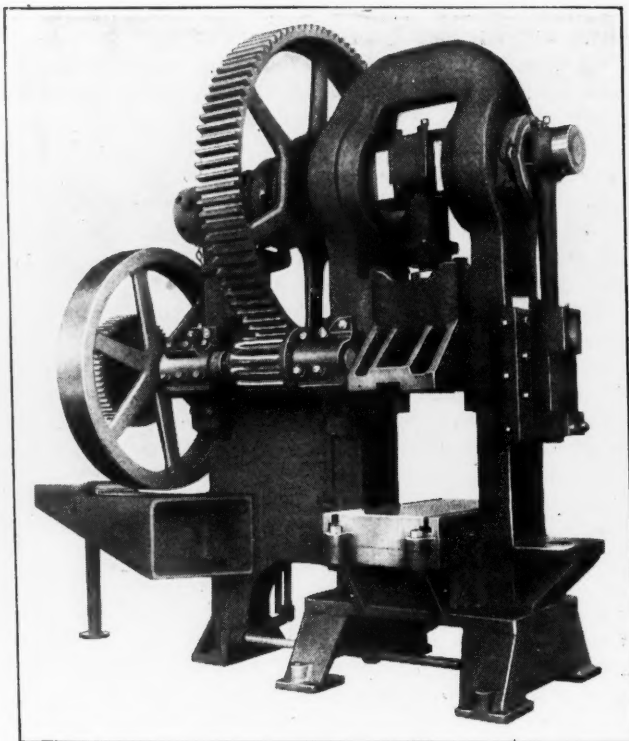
Rear View of Straight-sided Trimming Press, showing the Outside Slide
